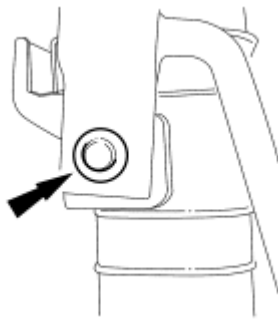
Locating A/C Condensor-To-Radiator Pushpin-Type Retainer
